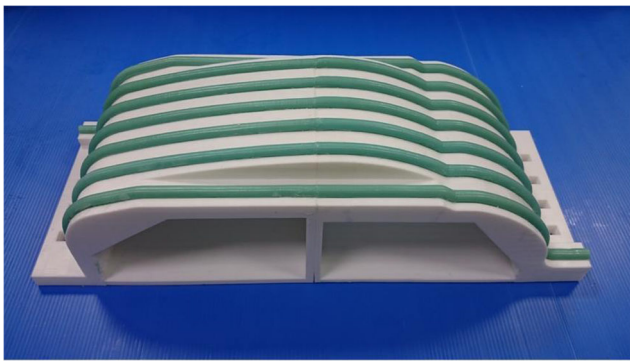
A typical wax conformal cooling channel inside the mold fabricated by the modified bisection method
